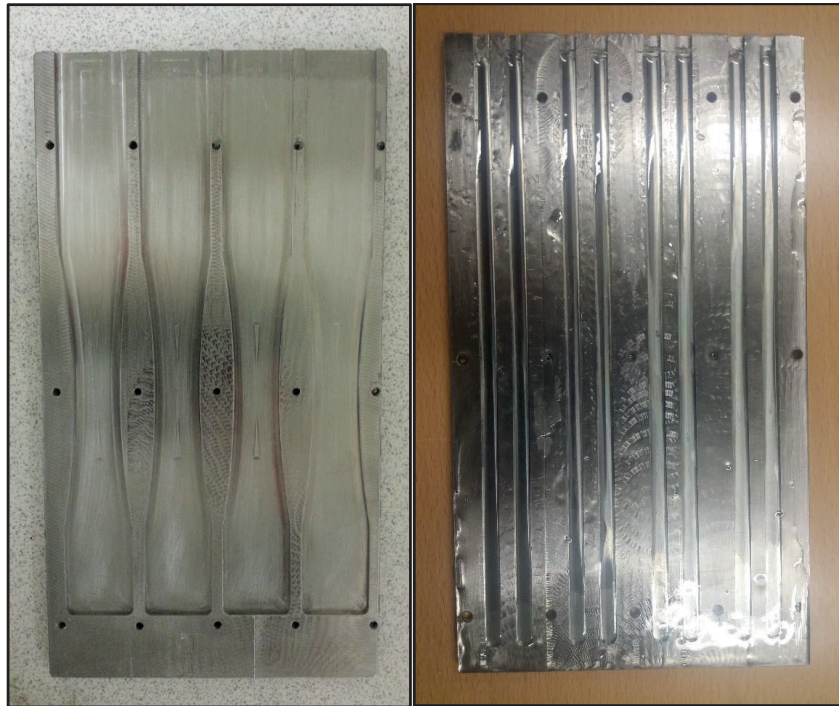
Steel molds for casting epoxy (left) dogbones and (right) rectangular samples.
